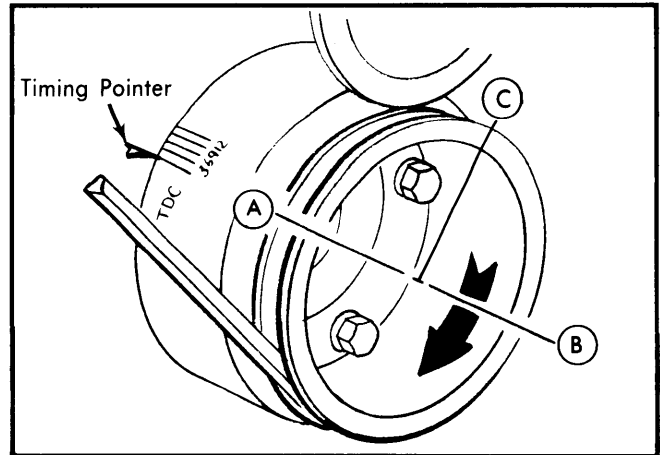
Crankshaft Positions for Adjusting Hydraulic Valve Lifters
